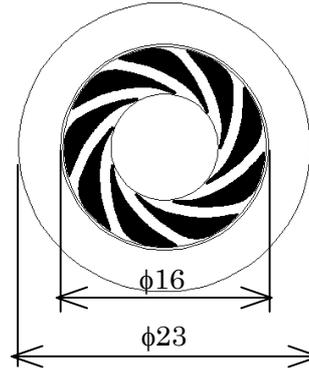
Designed blade shape for rotation test using the electromagnetic motor.
